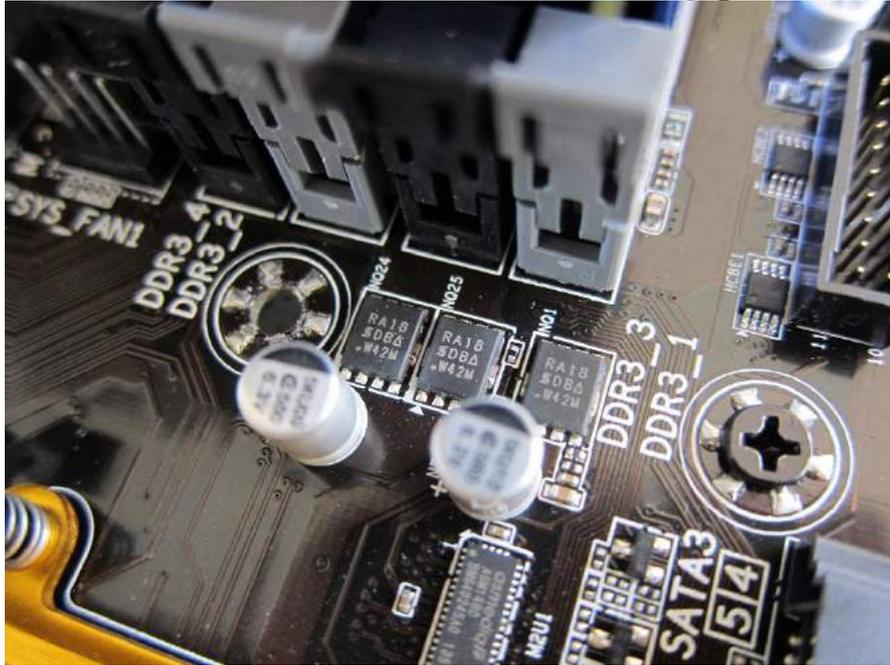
A motherboard mounting point – LHS no mounting screw, RHS with mounting screw installed.
